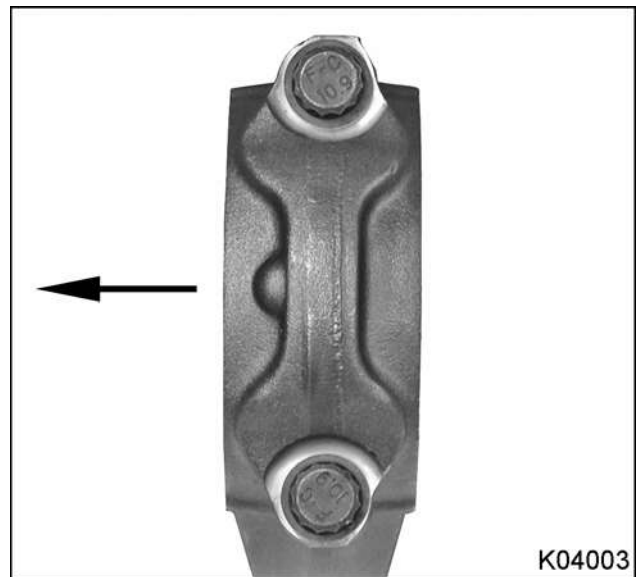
Connecting rod cap with M11 connecting rod cap bolts (protrusion points to front of engine)
